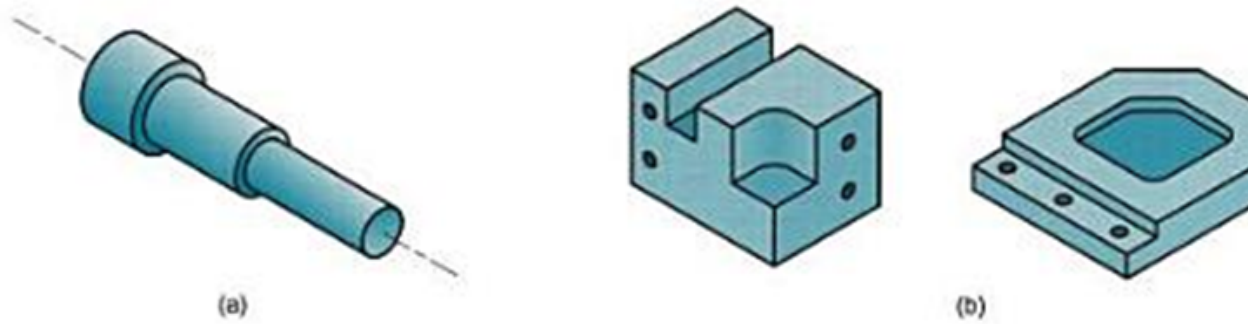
Machined parts are classified as (a) rotational, or (b) nonrotational, shown here by block and flat parts.
